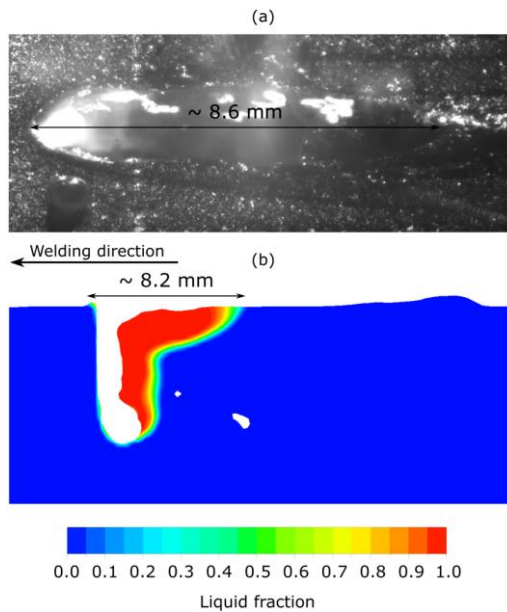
a) shows the high-speed camera recorded weld pool length from the middle of the weld seam. b) shows the simulated weld pool length at $t = 0.33$ s
